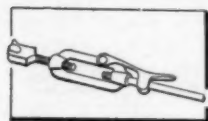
A turnbuckle fitted with a latch for locking the same in position, suggesting the use of this device for the lengthening of brake rods
